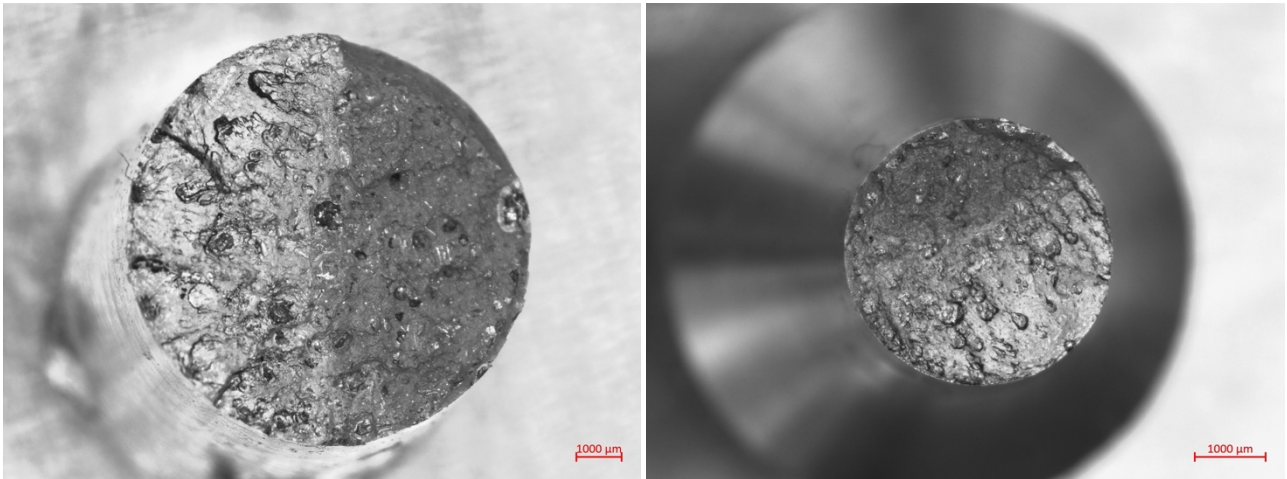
Fracture surfaces of coupons 6 (left) and 7 (right)
